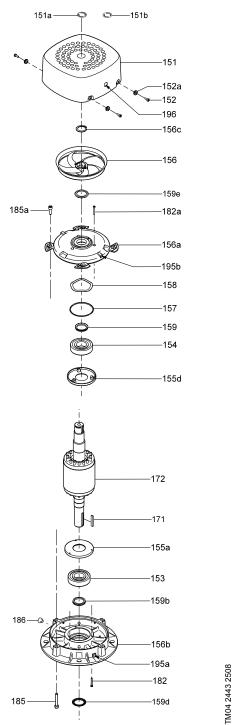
Detail from fig. 29, exploded view of the MGE-F
